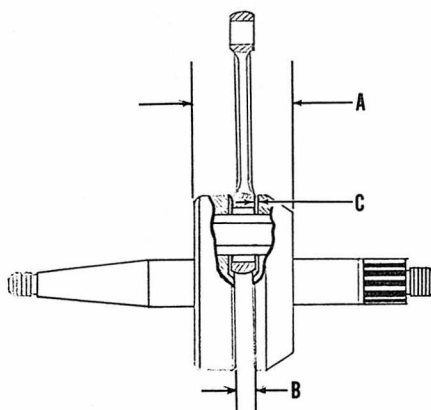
When assembling the crankshaft, observe the dimensional data included in text. Dimension (A) is distance between outside of crankshaft counterweights. Distance (B) is between inside of counterweights. Distance (C) is connecting rod side clearance.
